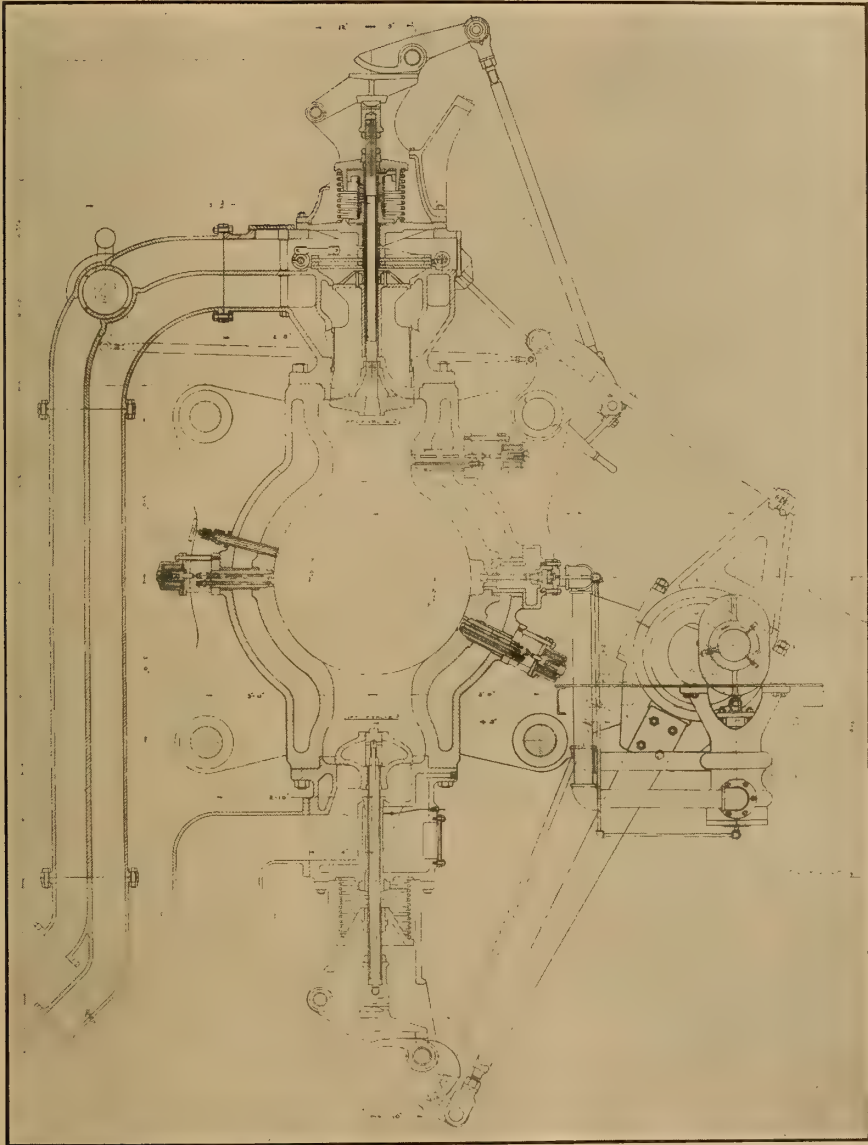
SECTION OF VALVE GEAR, 42-IN. X 80-IN. X 60-IN. GAS BLOWING ENGINE.
